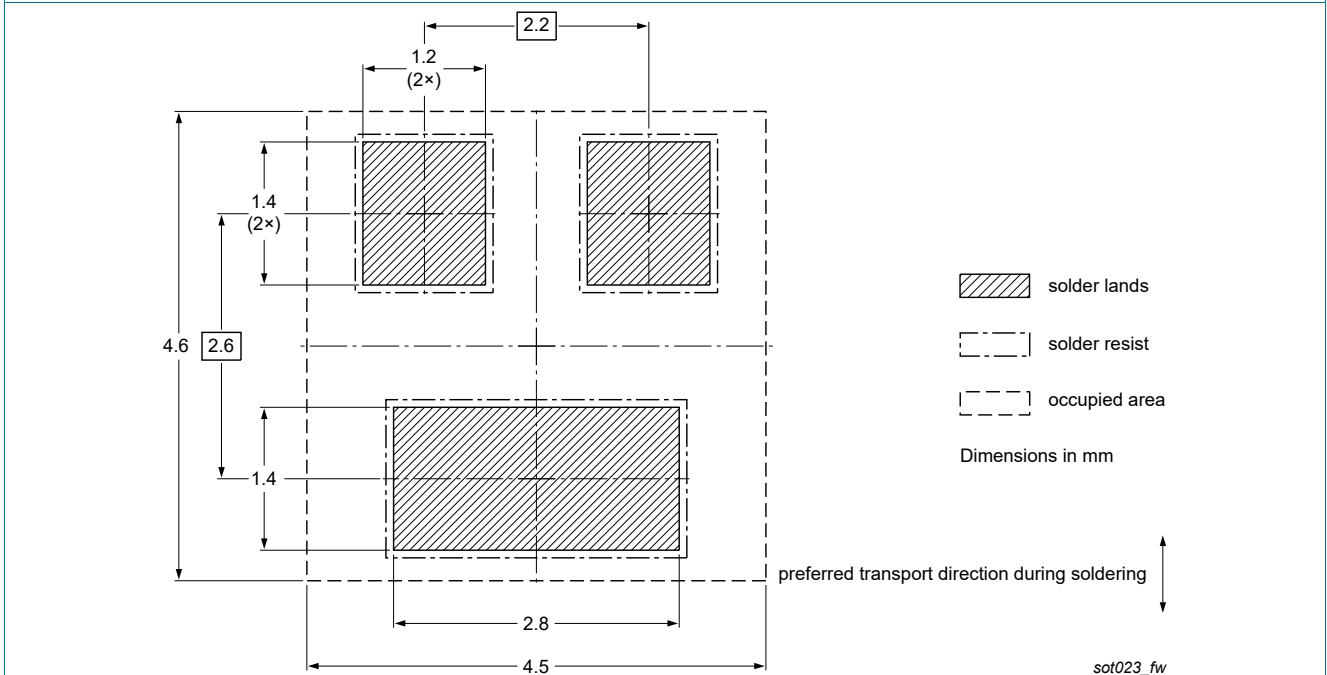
Wave soldering footprint for TO-236AB (SOT23)
